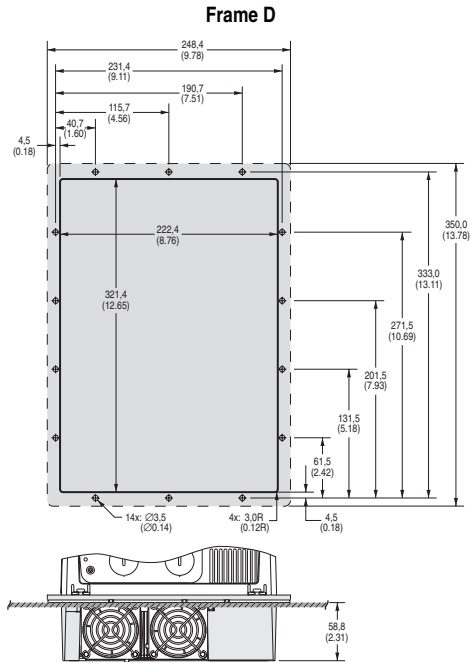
VTAC 9 Frame B...E Flange Mount Cutout Dimensions
